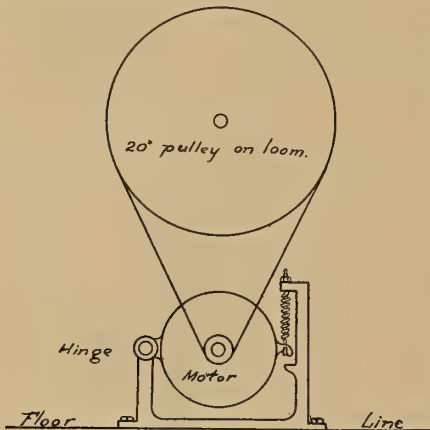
GERMAN METHOD OF DRIVE. MOTOR SUSPENDED IN BELT
